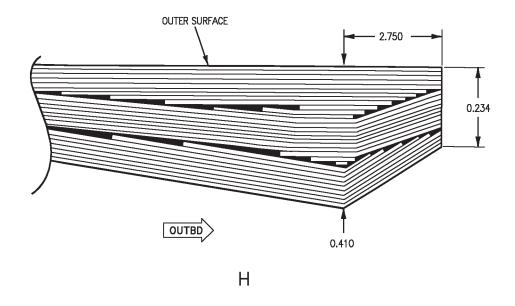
Outer Wing Upper Surface Inspection Areas (Sheet 3)
